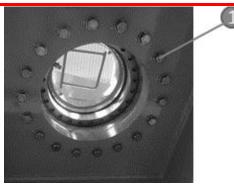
Turntable fall outfit 1. Bolt 2. Washer
